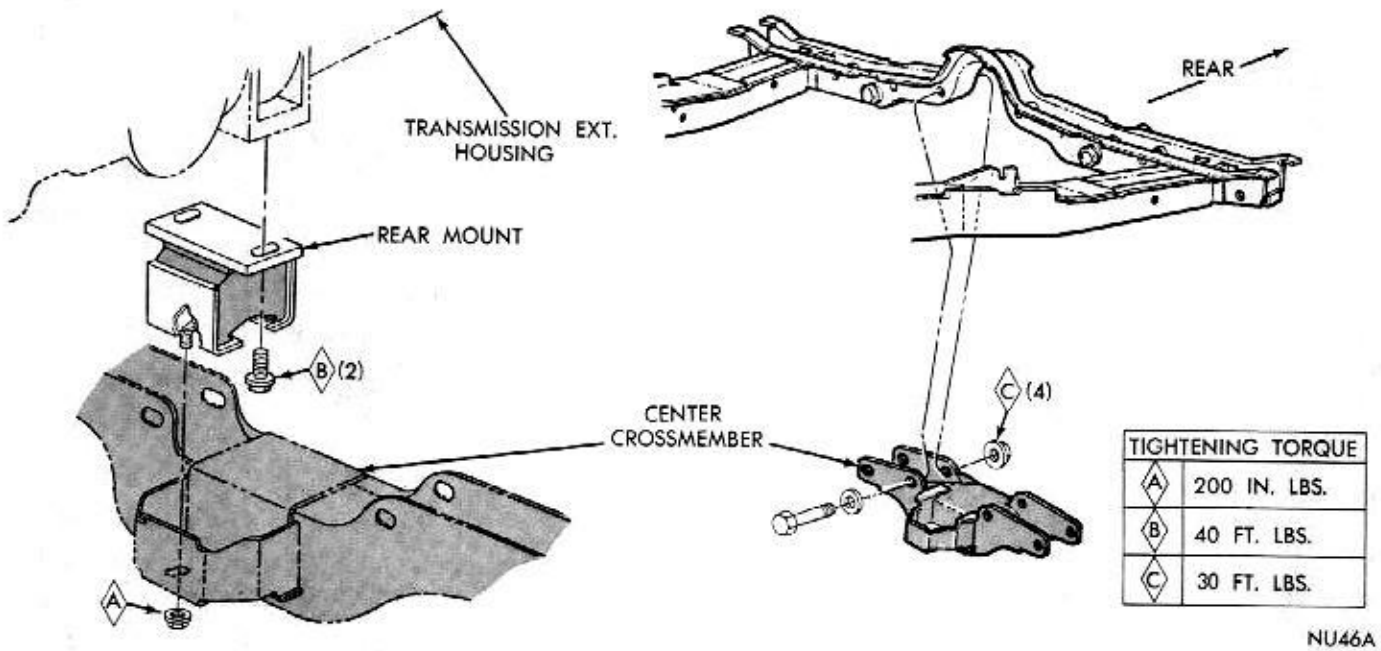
Center Crossmember and Rear Engine Mount (Coronet-Charger)
